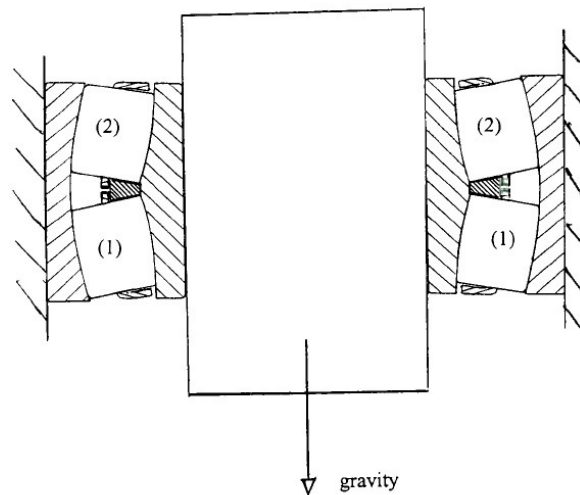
Bearing fixed on the outer ring and mounted vertically.
